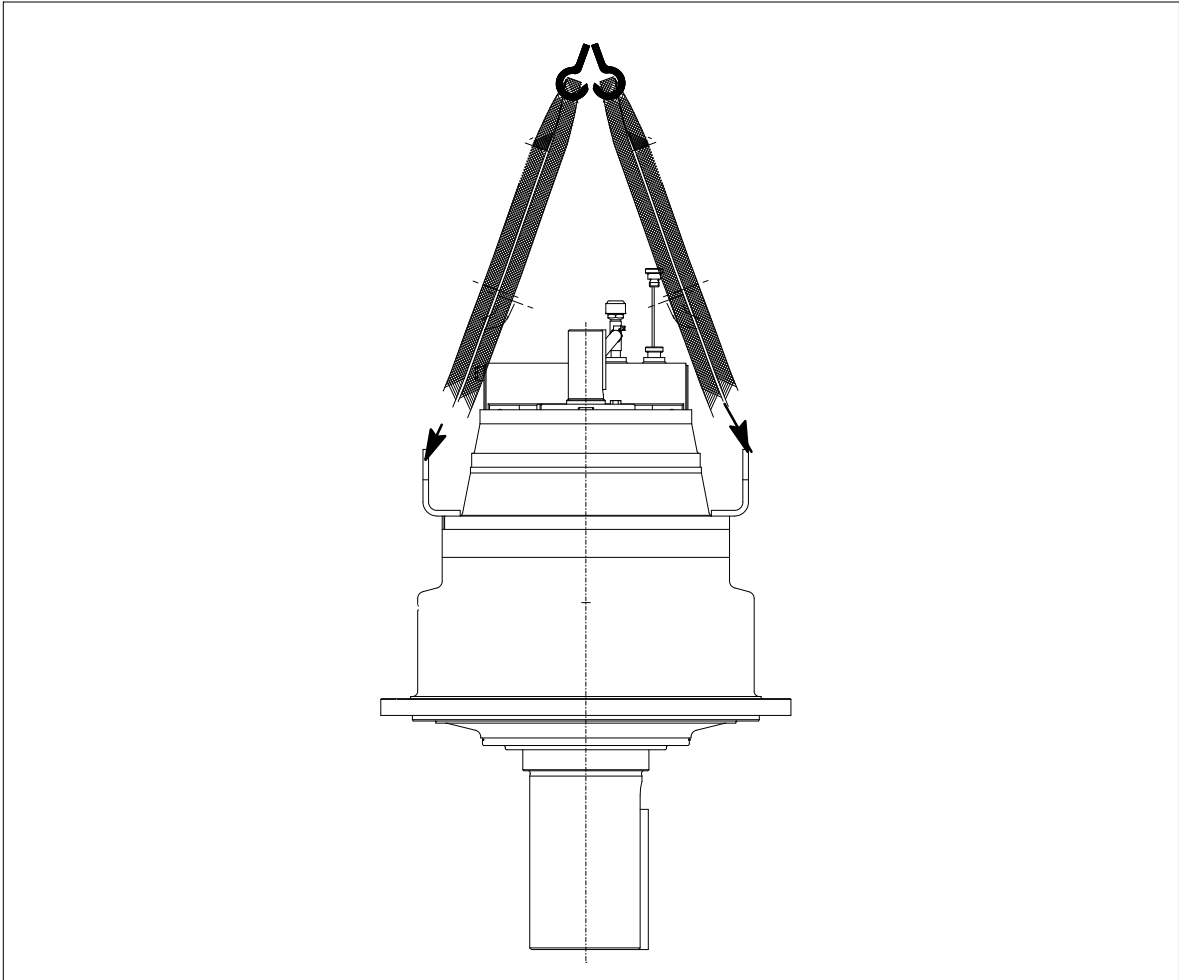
Attachment points on gear units of types O4C, O5C
